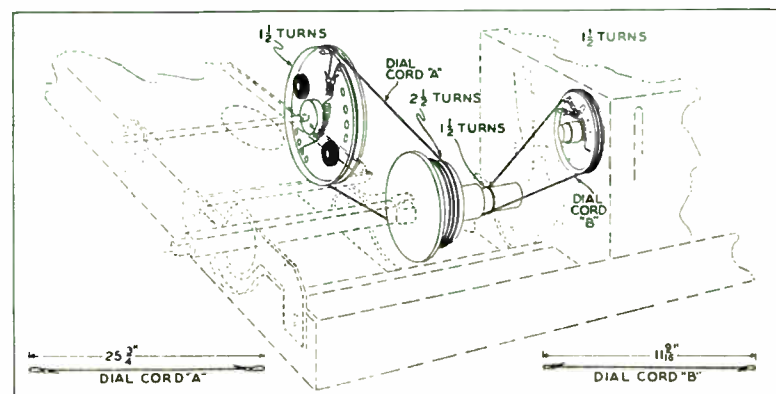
Dial cord stringing arrangement (TV-350 & TV-354).
